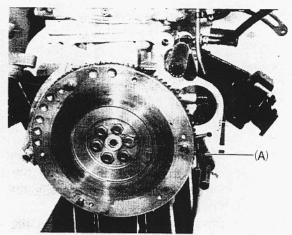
(A) Flywheel holder (Special tool 09924-17810)
